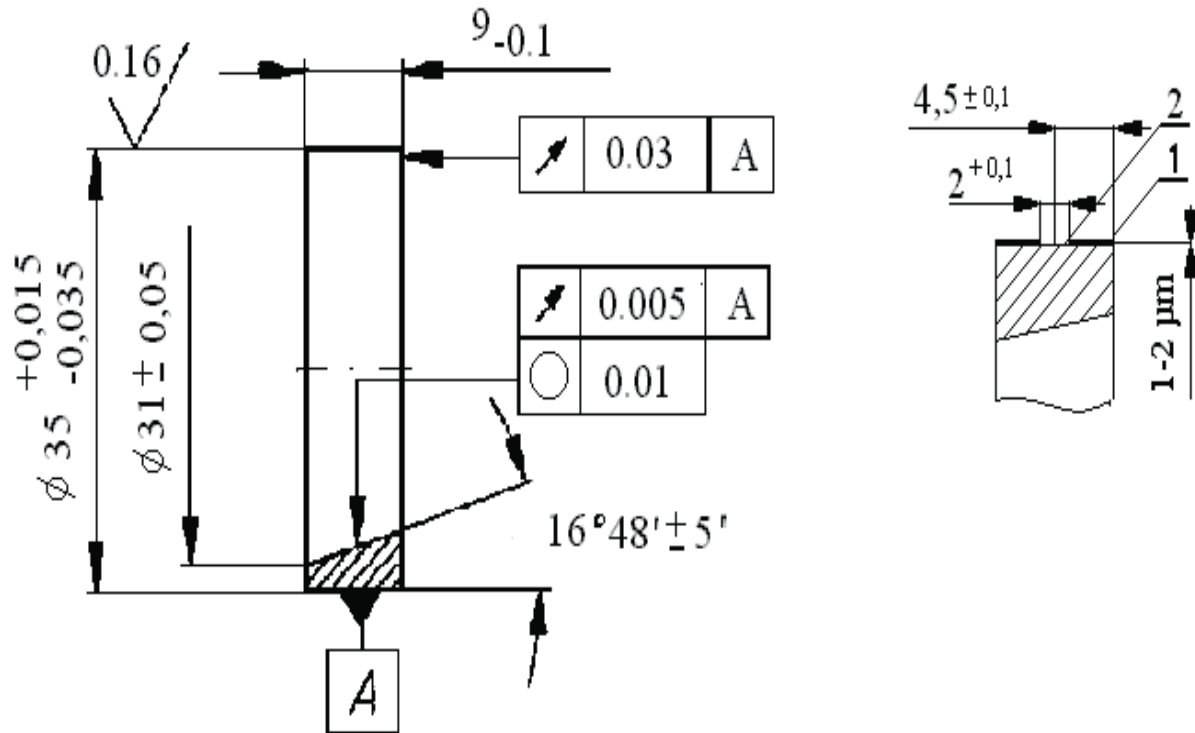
Shape and dimensions of two components ring samples 1–coating, 2–material of ring
